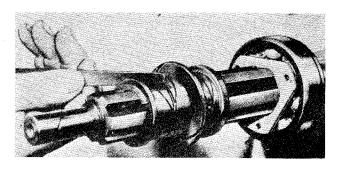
Checking overall float of mainshaft bushes with feeler gauge.
